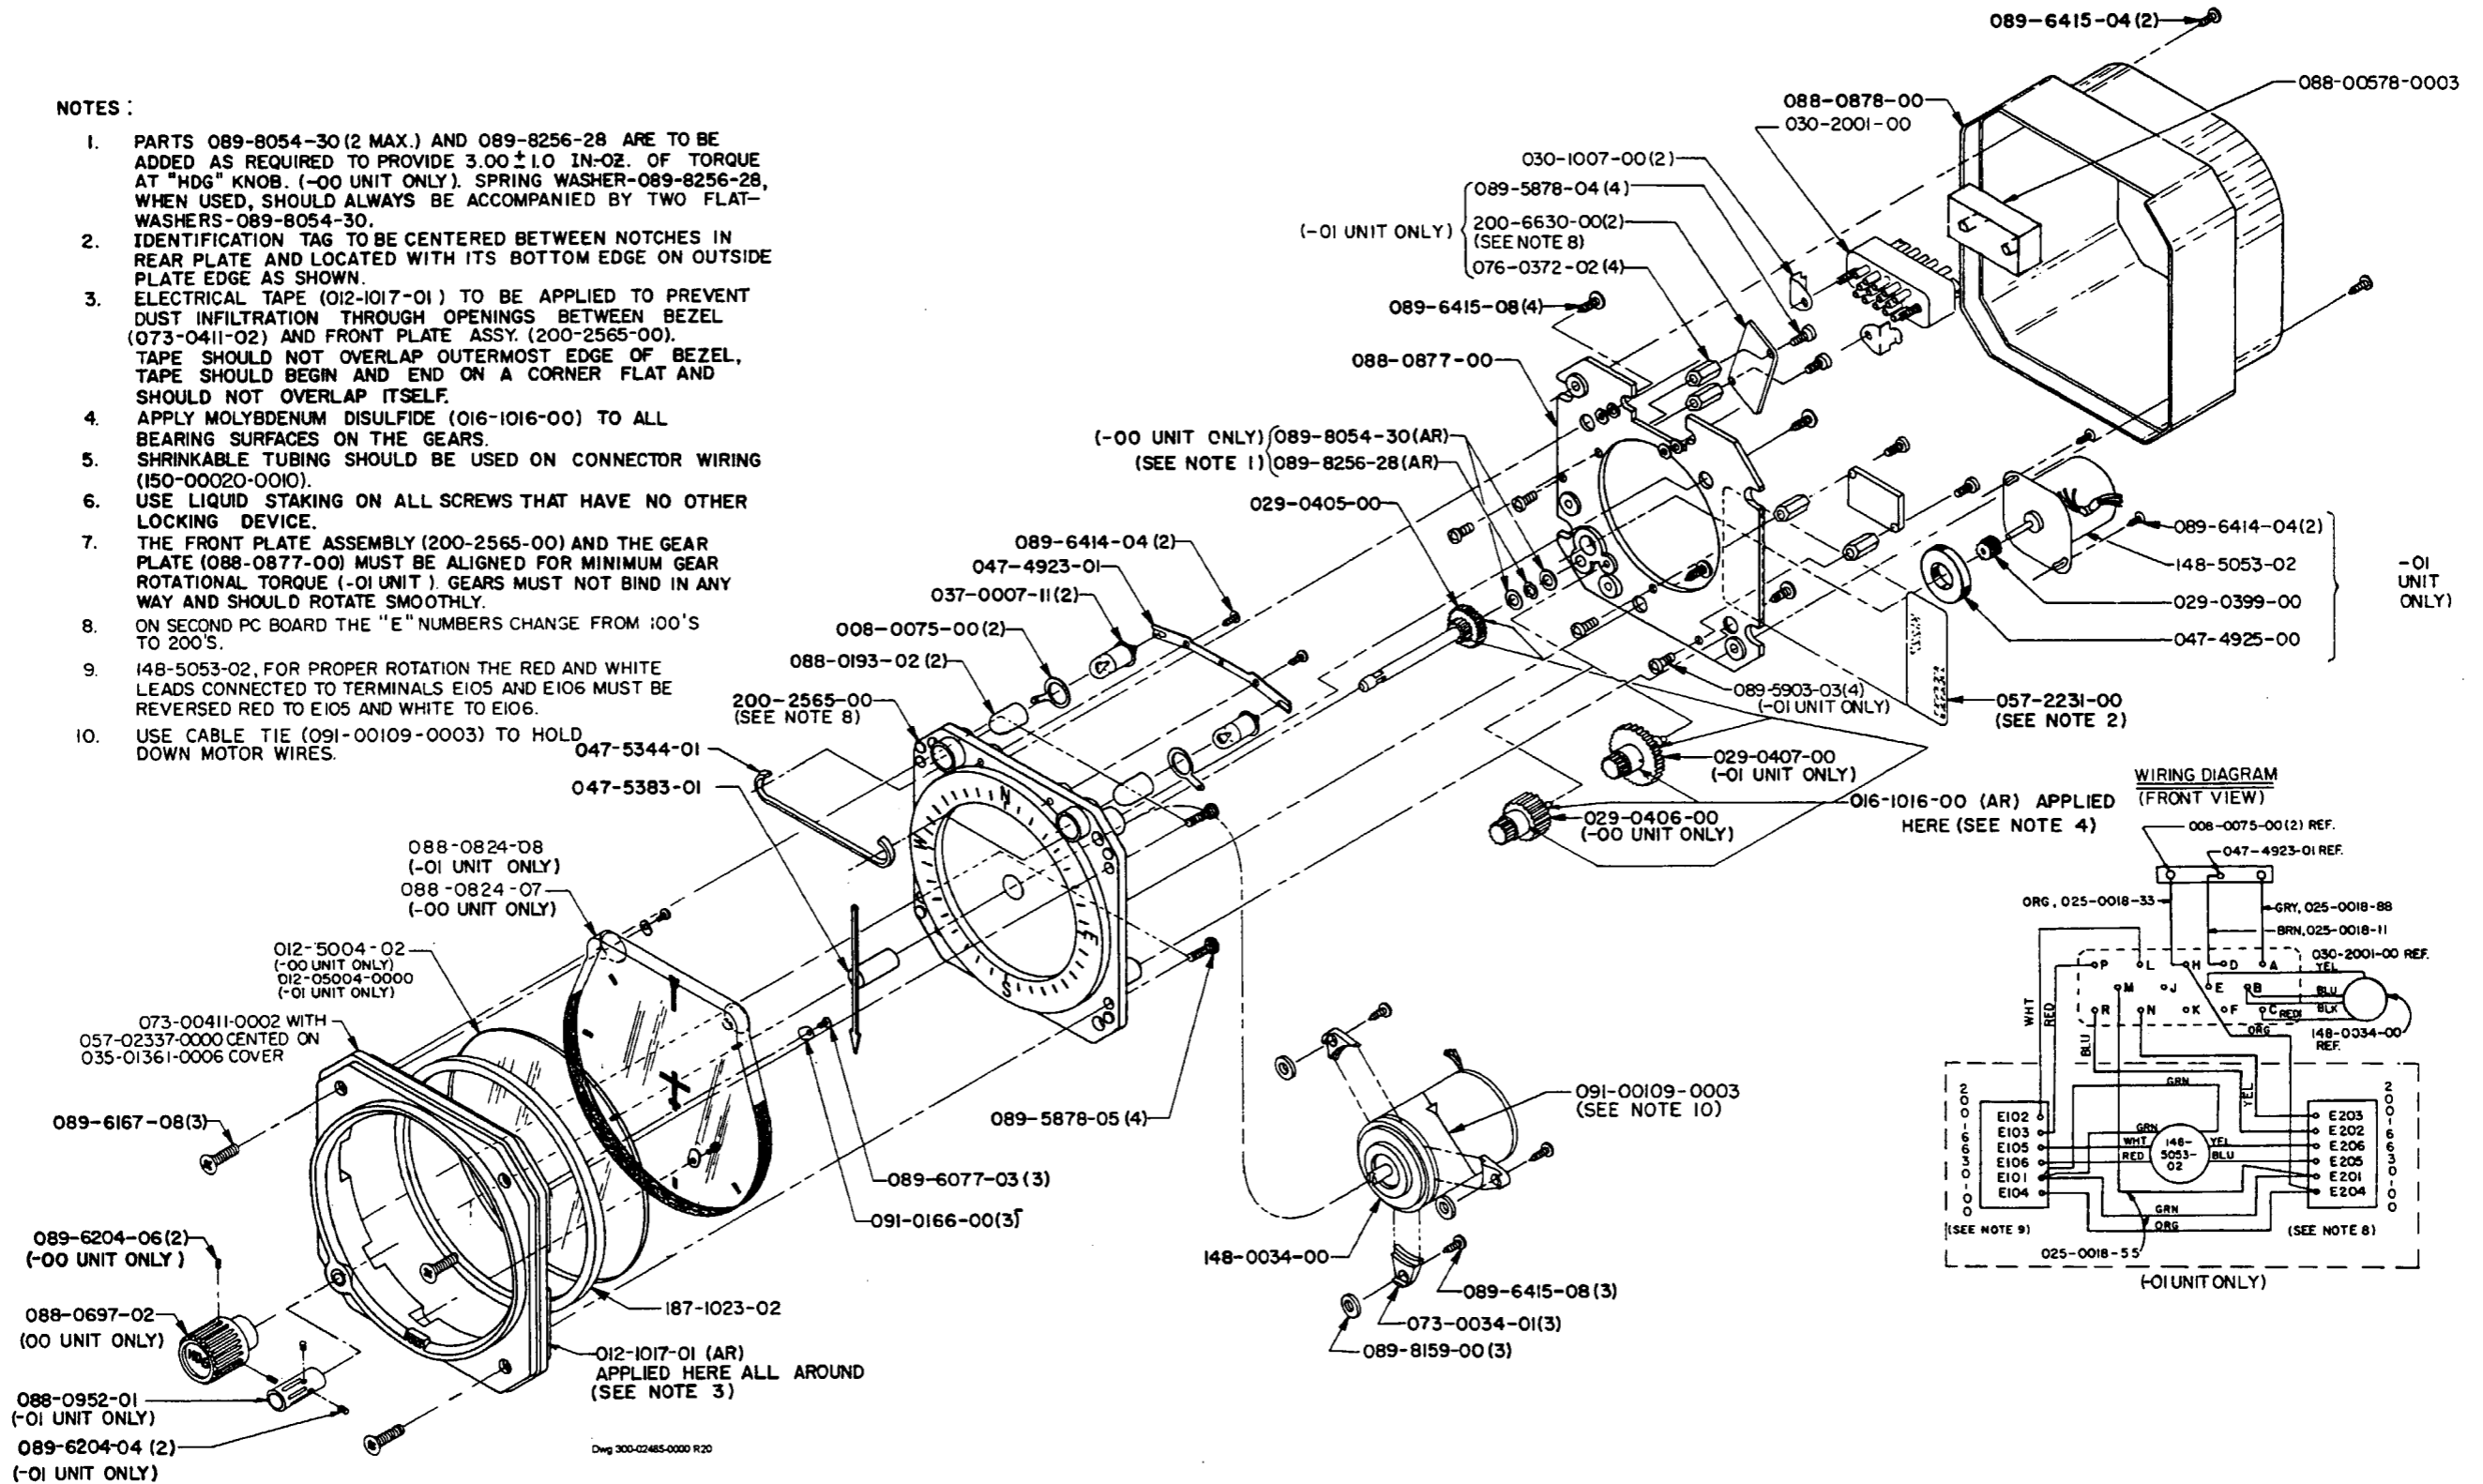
KI 227 FINAL ASSEMBLY
